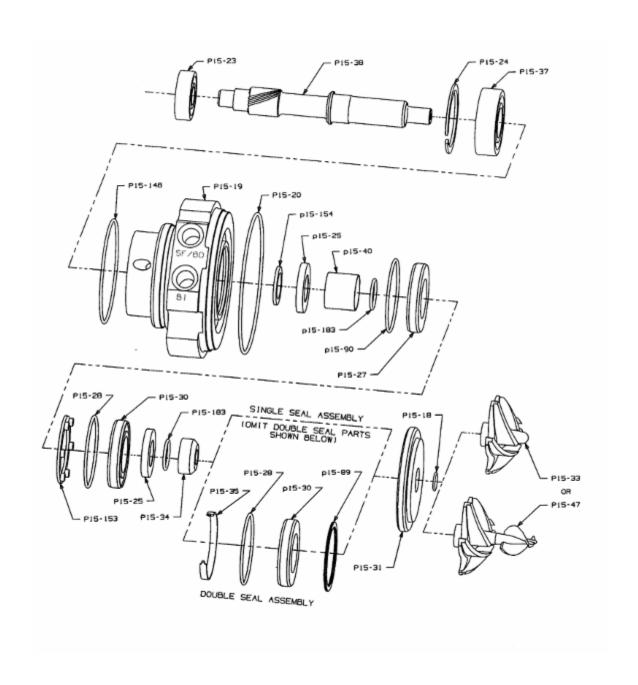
HIGH SPEED SHAFT ASSEMBLY EXPLODED VIEW
